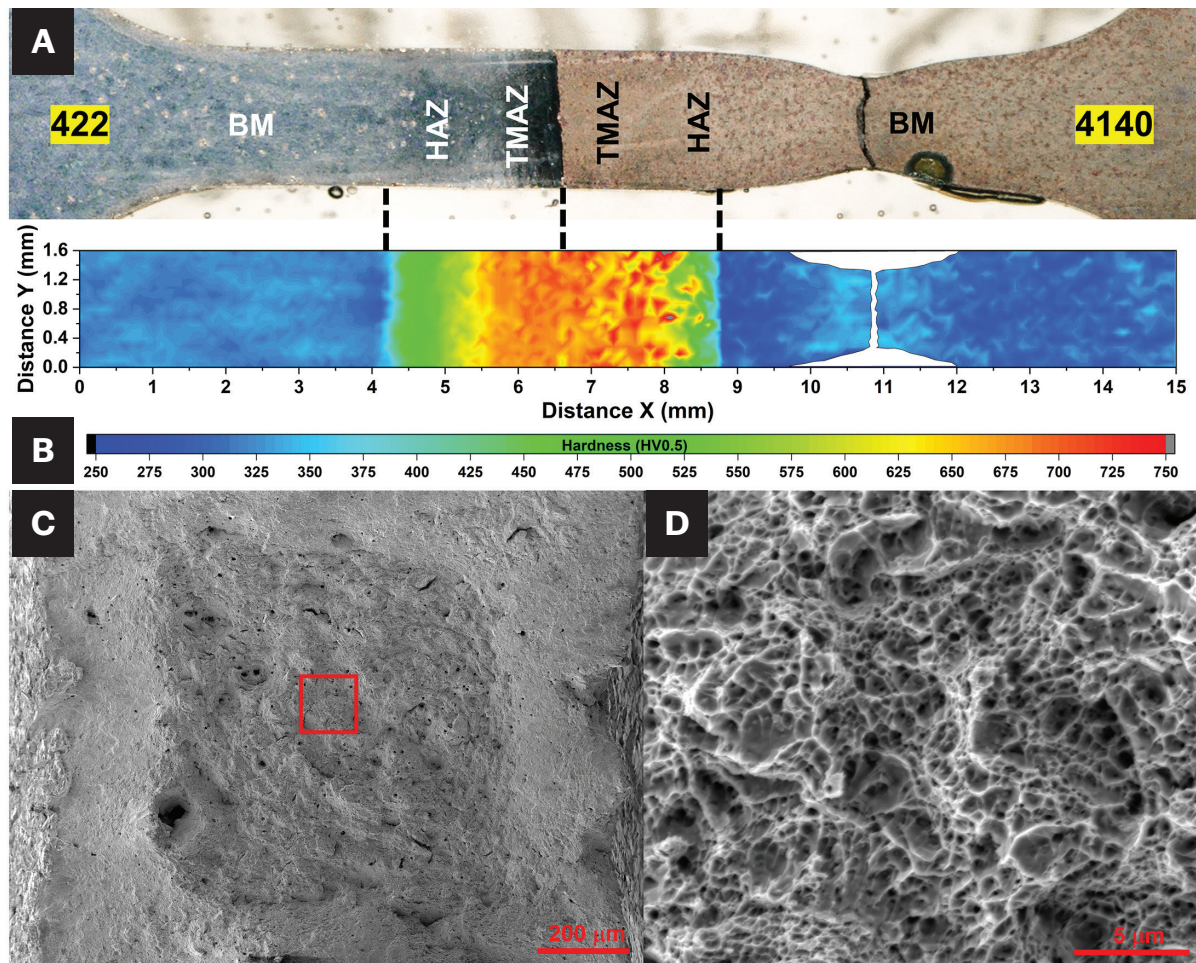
A – Optical image of a fractured tensile specimen from the as-welded 422/4140 inner weld; B – hardness distribution contour map; C and D – SEM images show fractography of the fractured tensile specimen.
